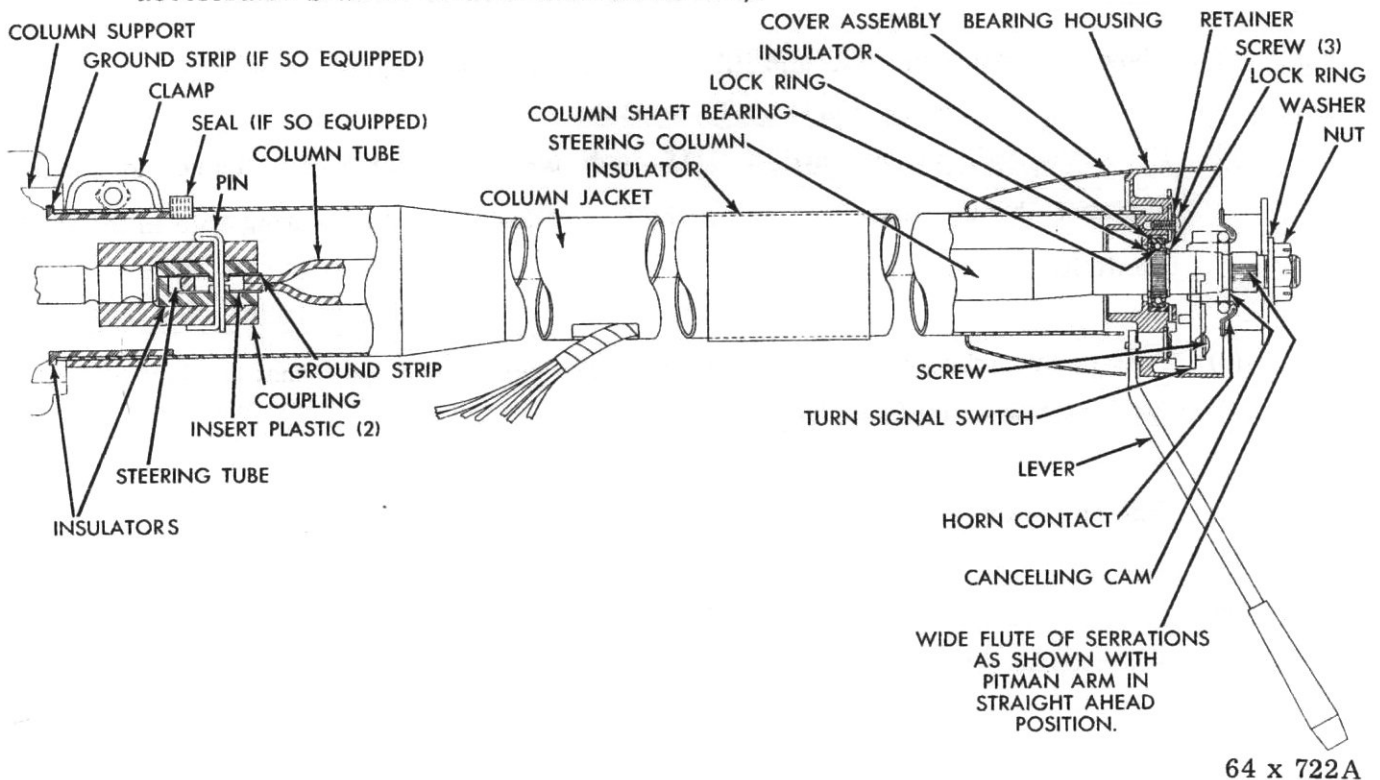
Steering Column Cross Section (Except adjustable steering wheel)
